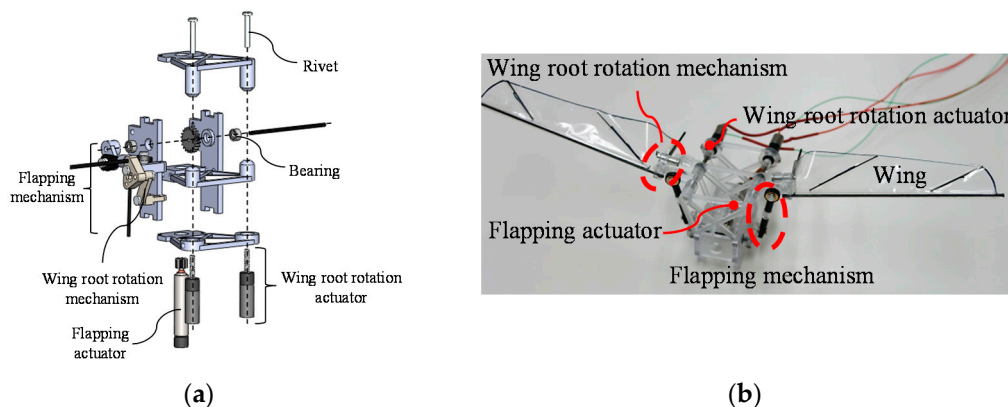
(a) Designed prototype and (b) front view of fabricated prototype.
